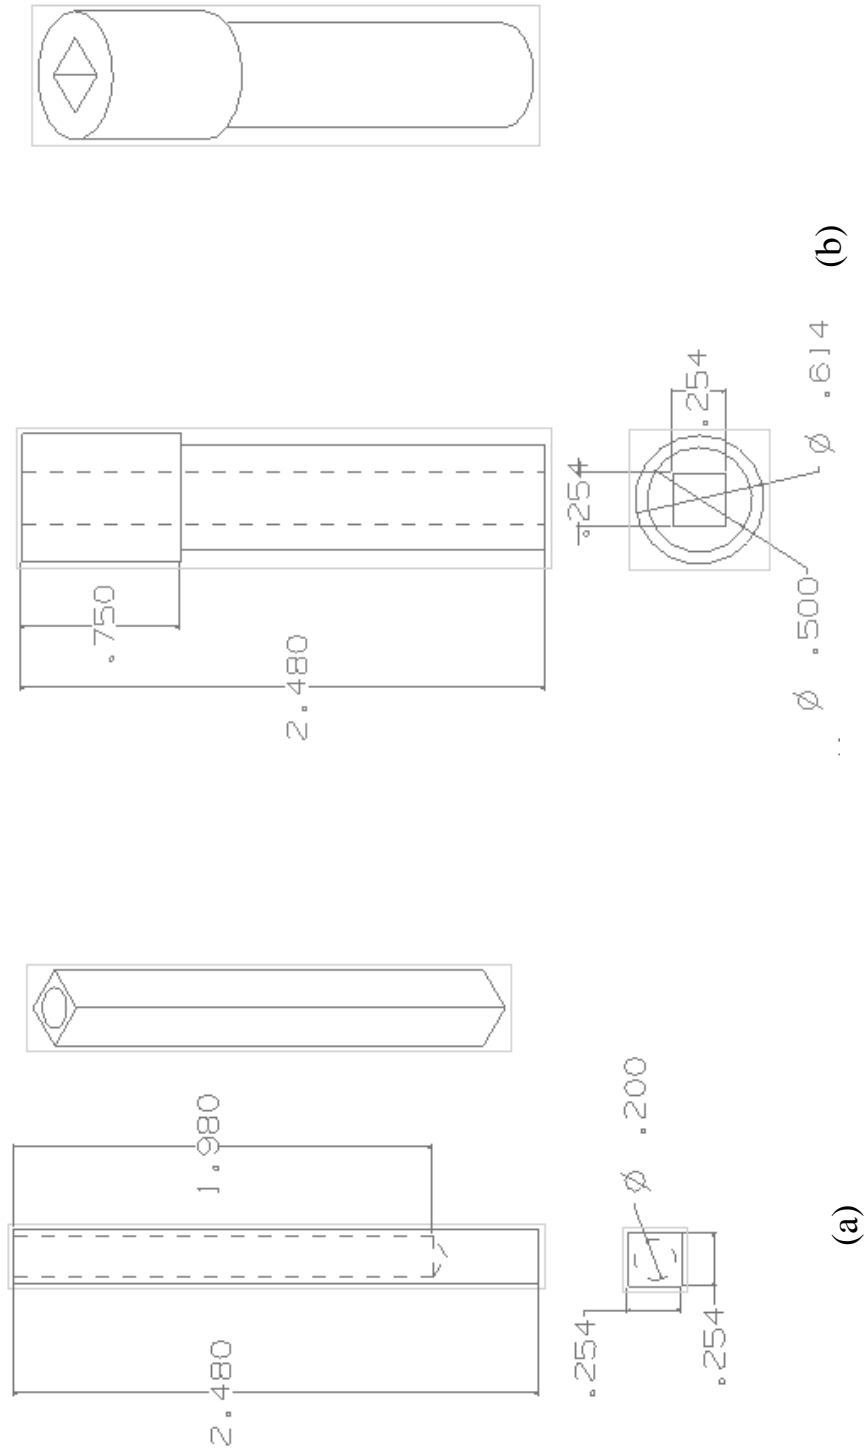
Thermocouple fixture. Internal part (a), external part (b)
